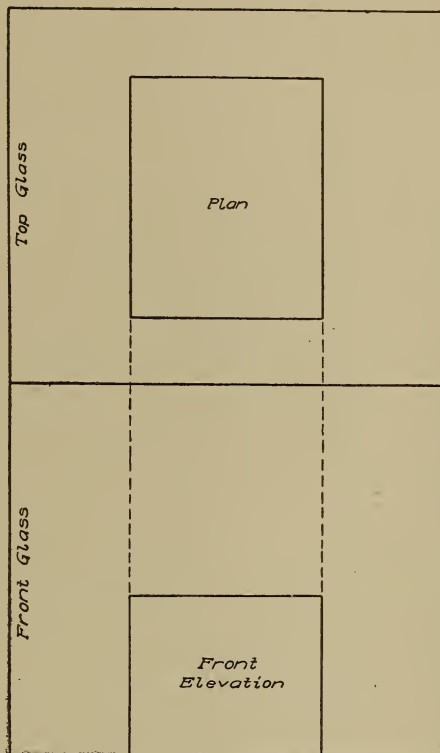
Plan and Elevation of Box Shown in Fig. 98
